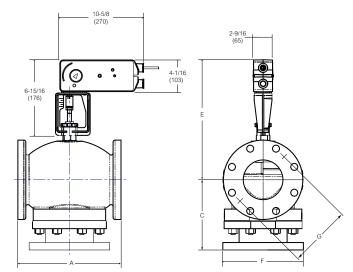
Mx41-720x with 2-1/2" to 5" Flanged 3-Way Globe Valves
